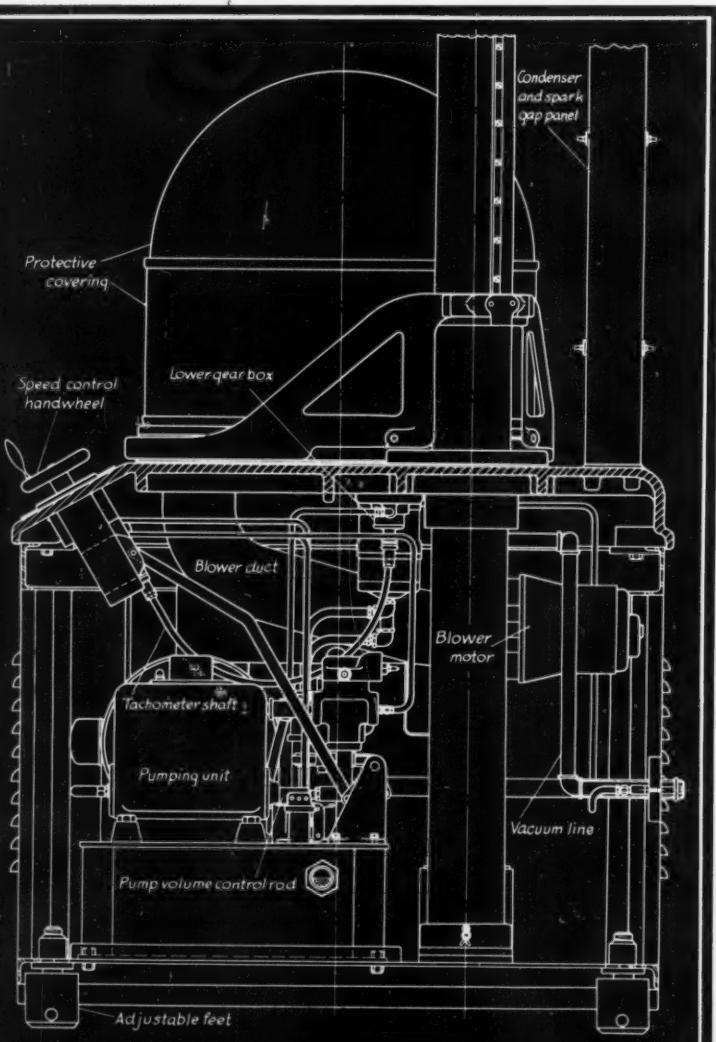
Left—Side elevation with panel removed shows linkage for speed control, also pumping unit blower, duct and tachometer drive
